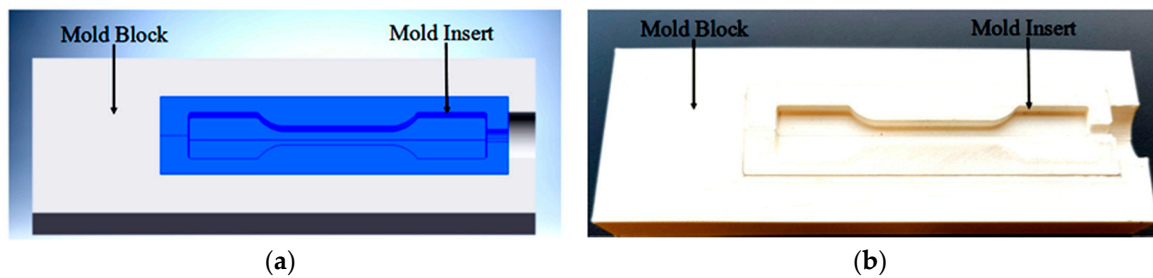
(a) CAD model of mold assembly and (b) FDM printed mold assembly.
